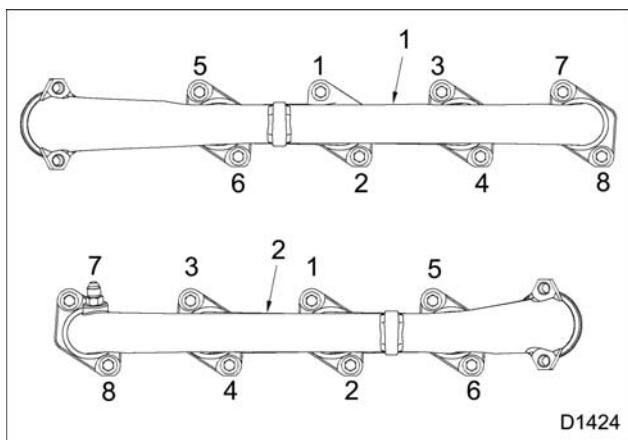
Tightening sequence for exhaust manifold mounting bolts
